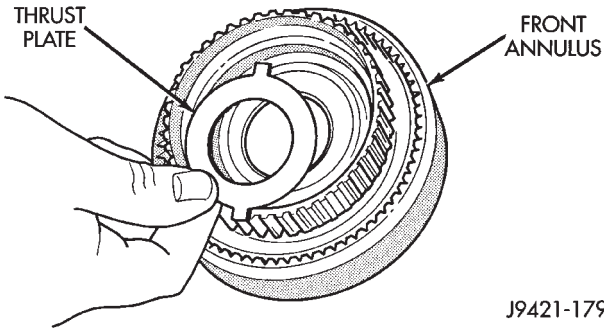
Positioning Thrust Plate On Front Annulus Support
